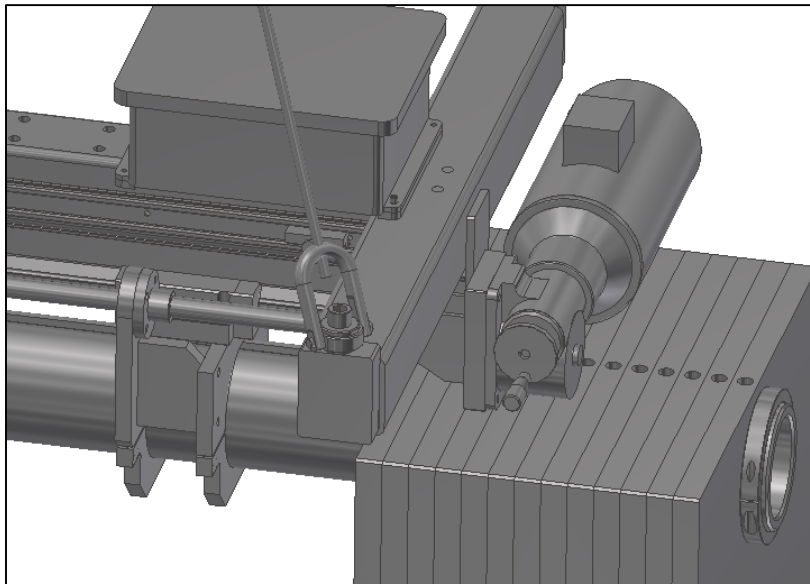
Drive actuation unit for Wisconsin Tooling (University of Wisconsin, 2001).
